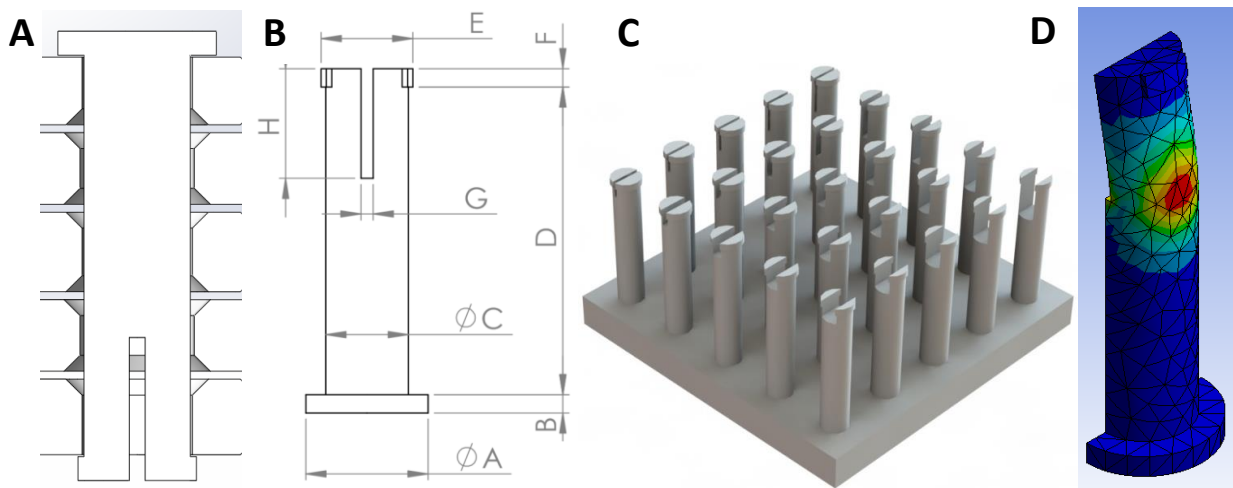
(A) Pin Locking System. (B) Dimensioning. (C) Pin Testing Rig. (D) FEA of Loading on pin.
